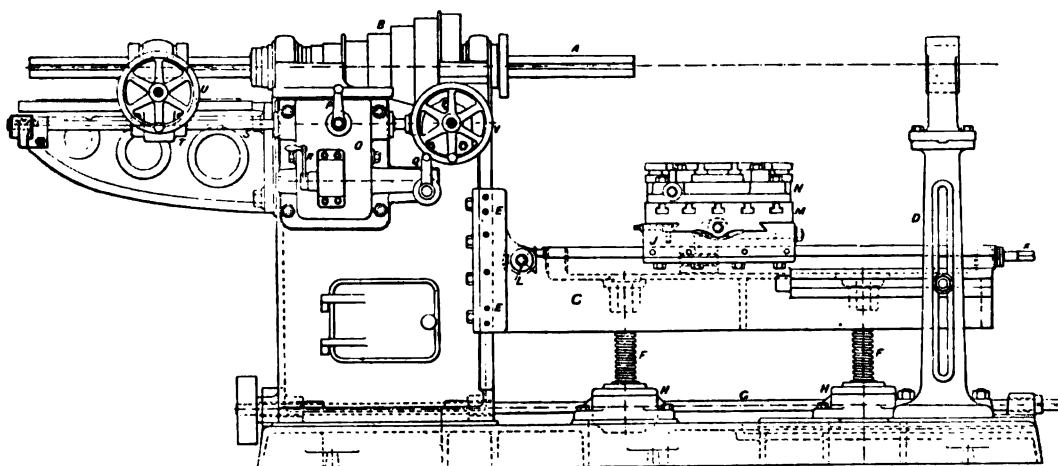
Horizontal Boring Machine. Front Elevation. (H. W. Ward & Co.)
